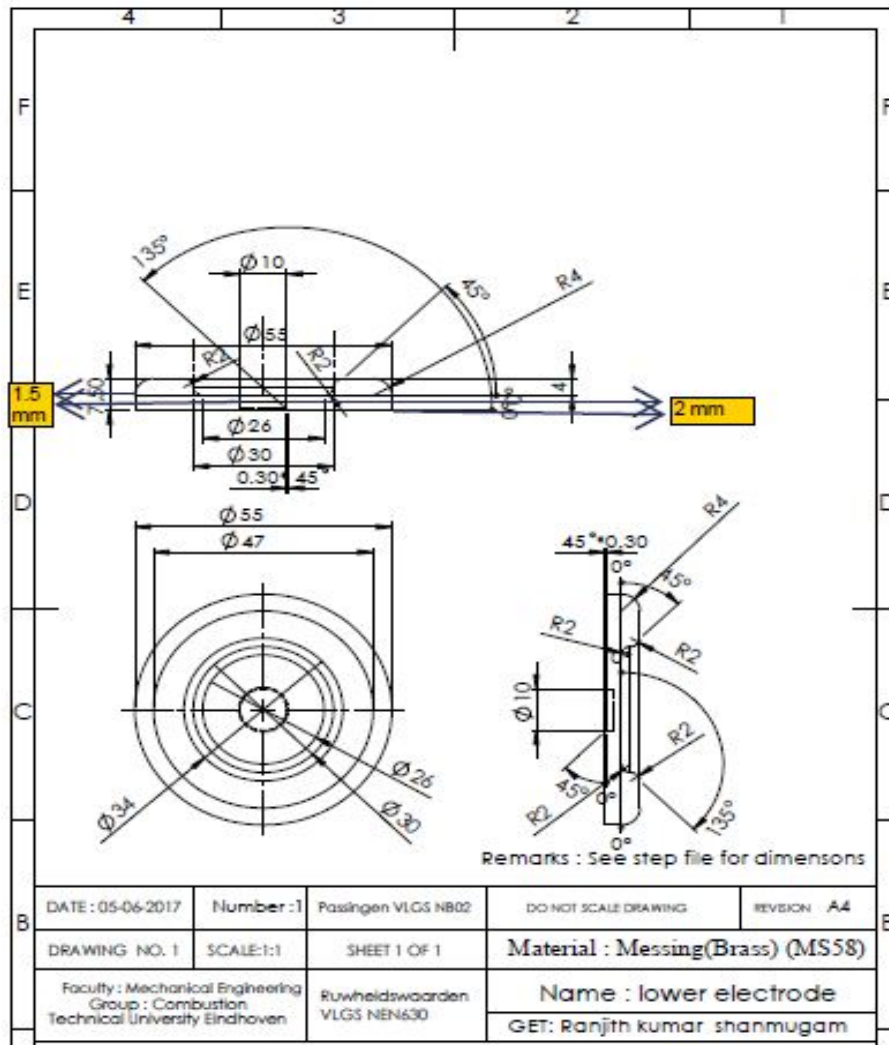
Technical drawing for the new capacitor (lower electrode)
